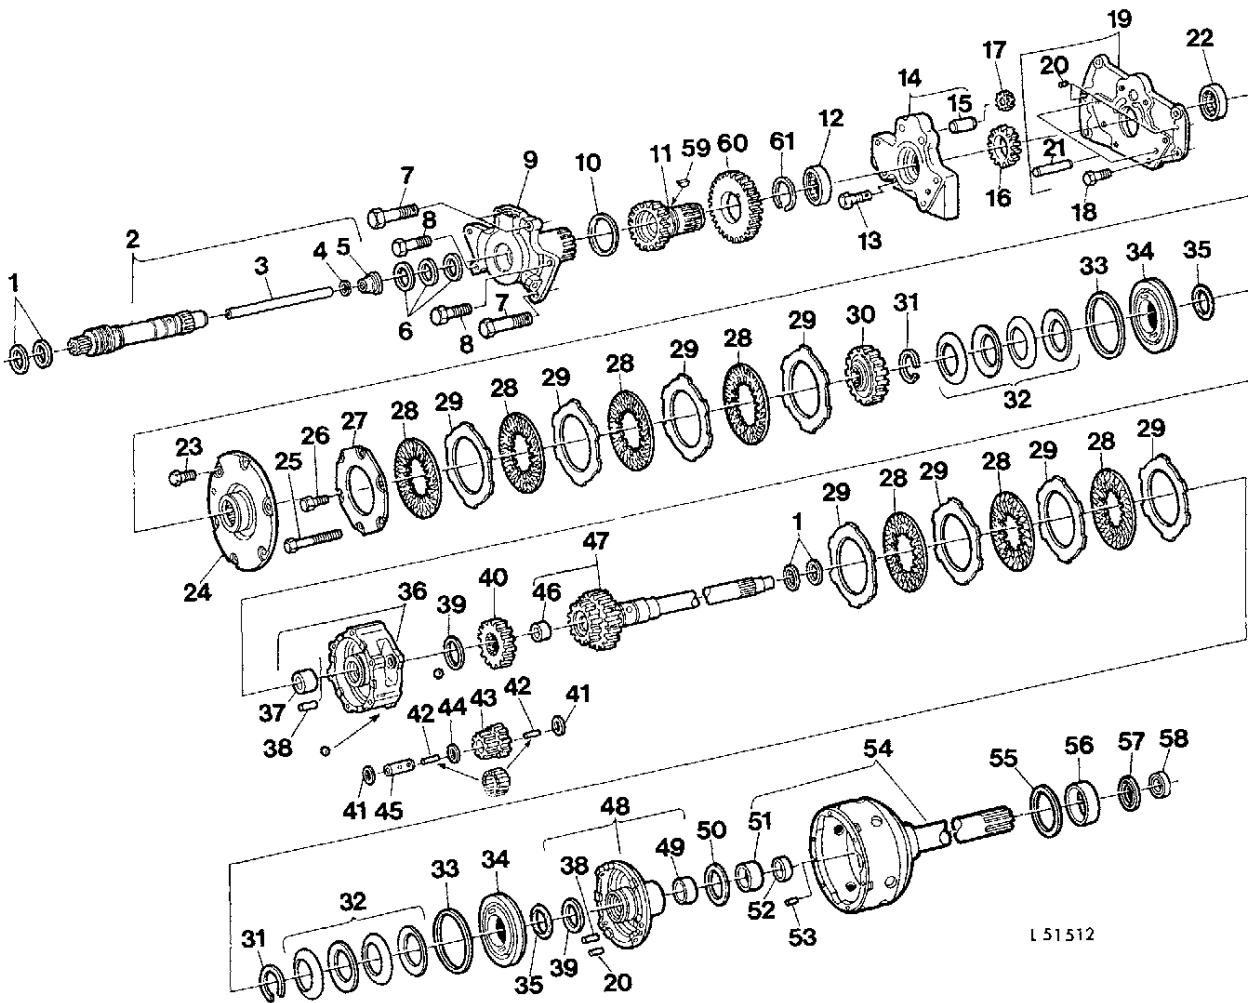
HIGH-LOW Shift Assembly, Exploded View
